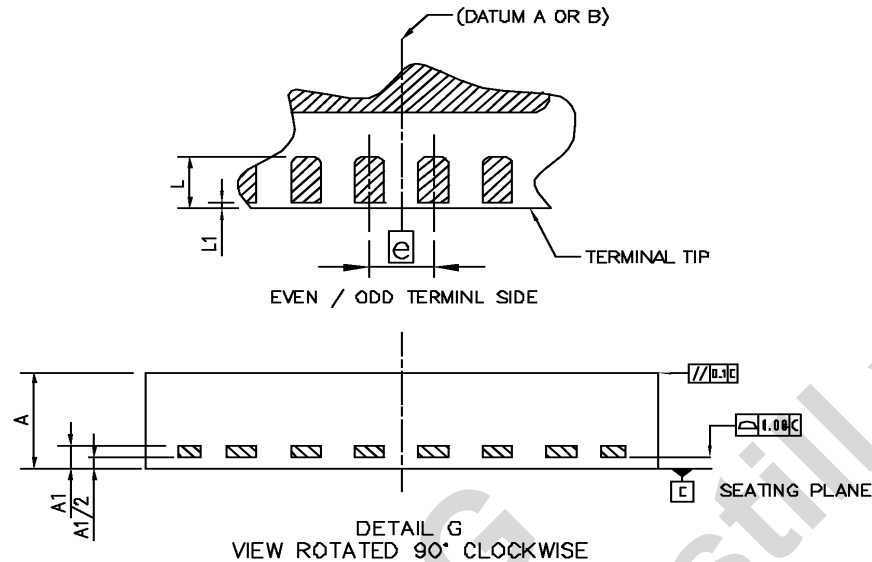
QFN 24 – 4x4mm with Exposed Paddle
